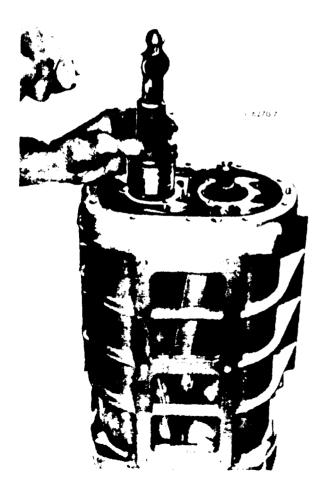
D-18. Installing Ball Bearings on Rotor Shaft
